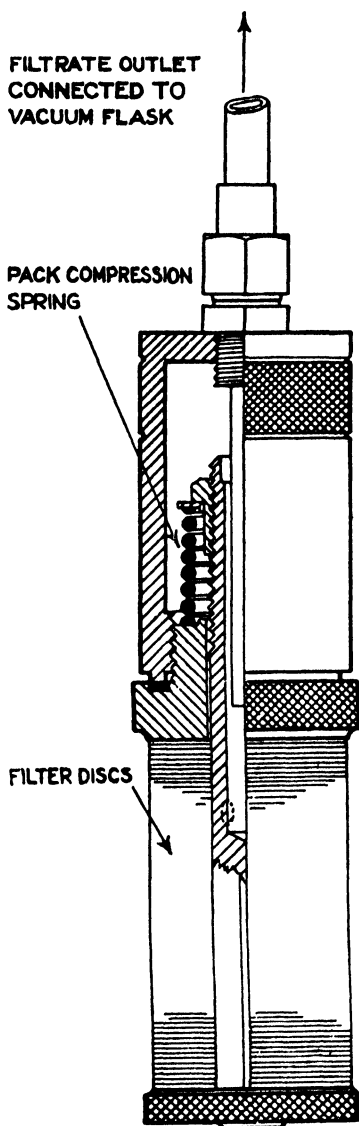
SPRING-LOADED VACUUM LABORATORY UNIT.
